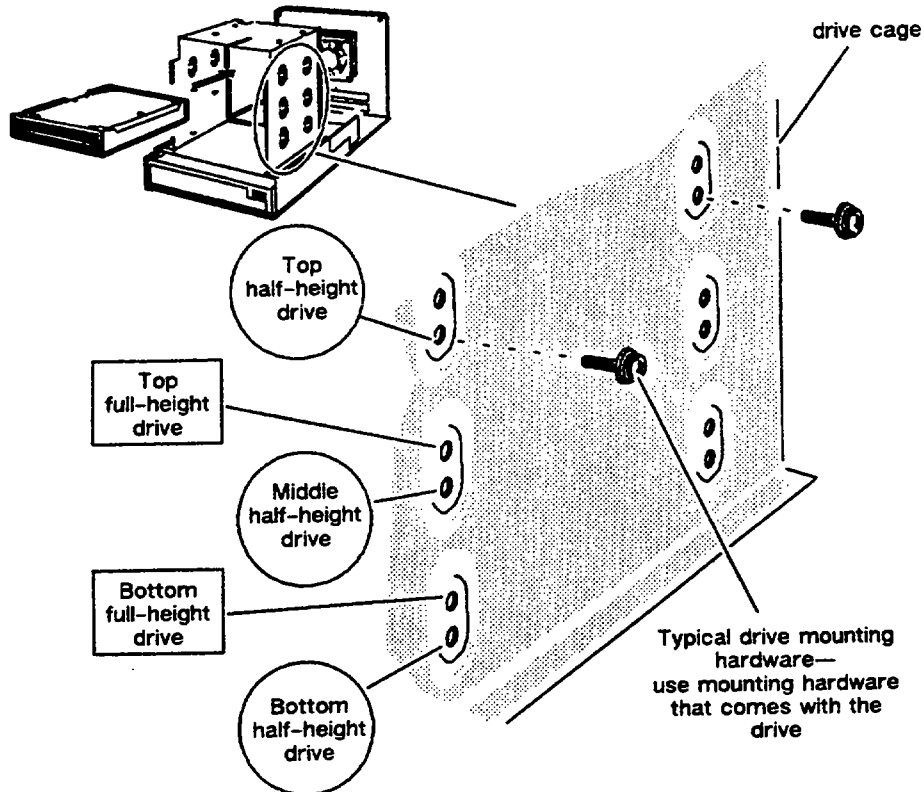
Mounting Holes for a Full-Height Drive or a Half-Height Drive
